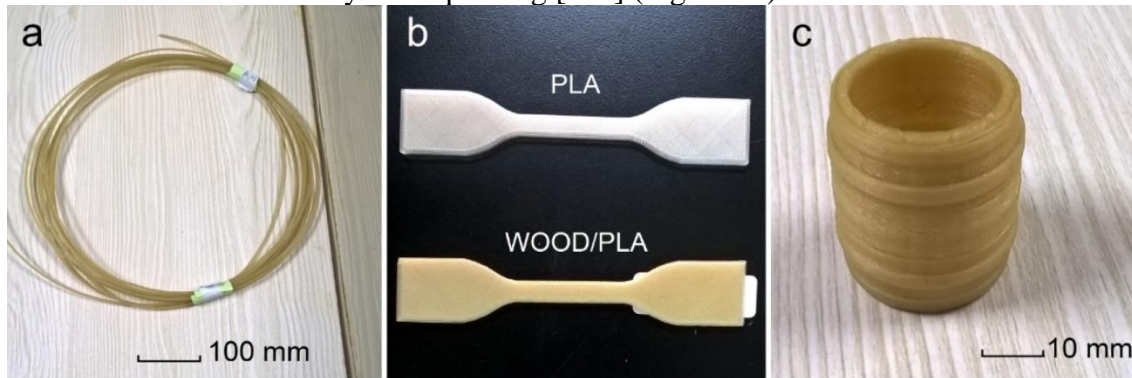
Filament, test specimens and 3D product: (a) Wood flour (WF)-filled PLA composite filaments; (b) mechanical testing specimens for tensile measurement; and (c) a barrel made WF-filled PLA fabricated by FDM printing. Reprinted in part with permission under a Creative Commons CC BY 4.0 License from ref.[153].
